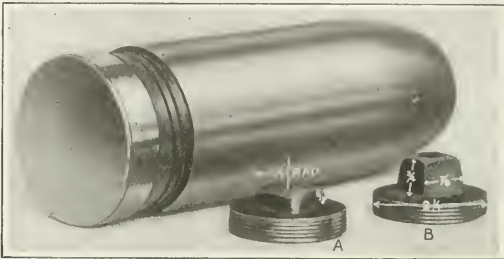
Three-inch High-explosive Shell, showing Finish left by Besly Grinder; also Two Types of Gas Plugs
